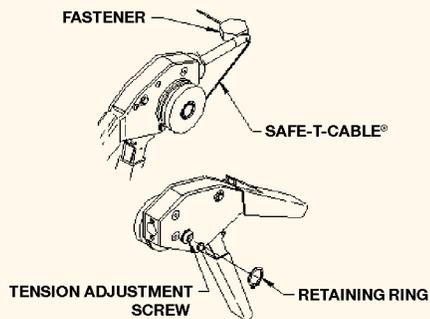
Adjustable Tension Safe-T-Cable® Tool
